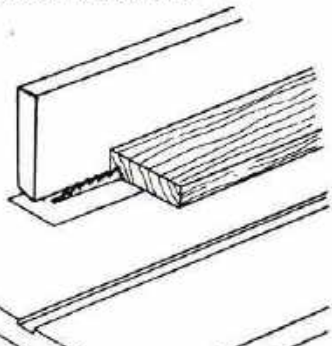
CUTTING A RABBET ON THE FLAT SIDE
